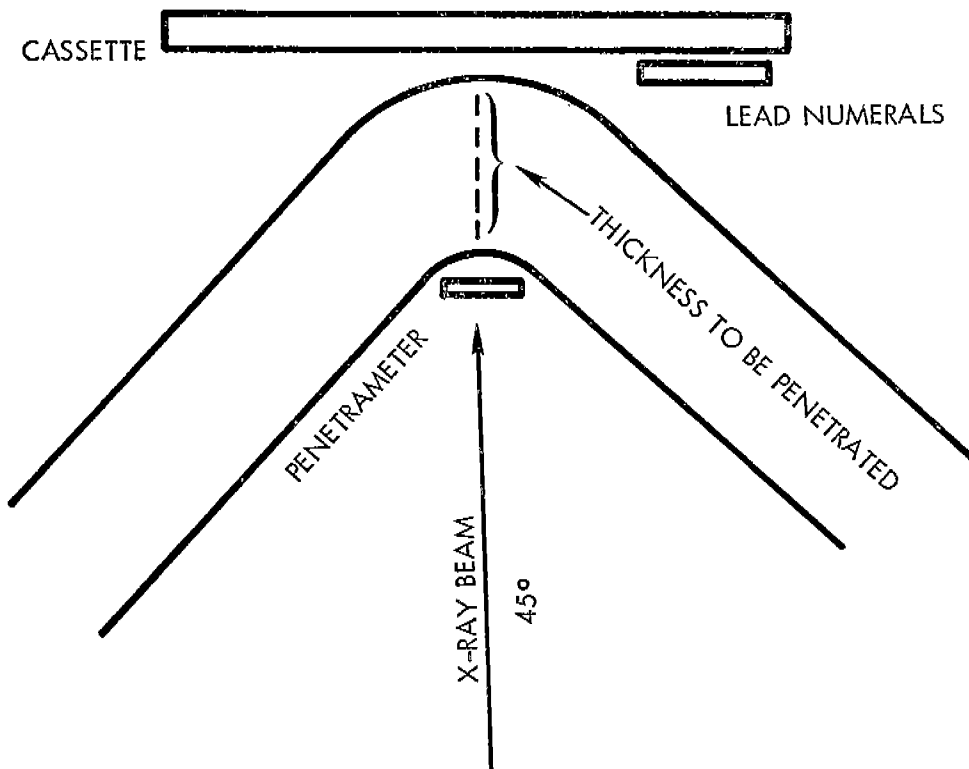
B TECHNIQUE FOR THE RADIOGRAPHIC INSPECTION OF FULL PENETRATION CORNER JOINTS
